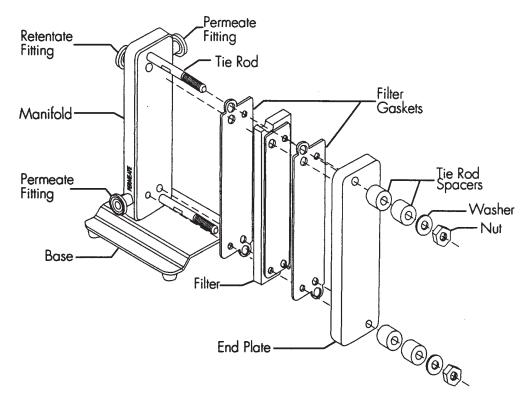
Exploded view of Pellicon 2 and 3 Mini Holder
